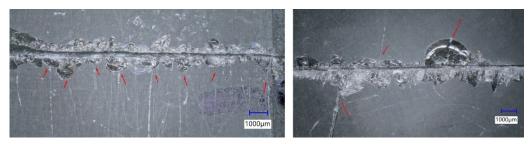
Bottom surface of "Sibelco Clear bottle" specimen showing the link of lateral damage to surface defects such as scratches or bubbles.
